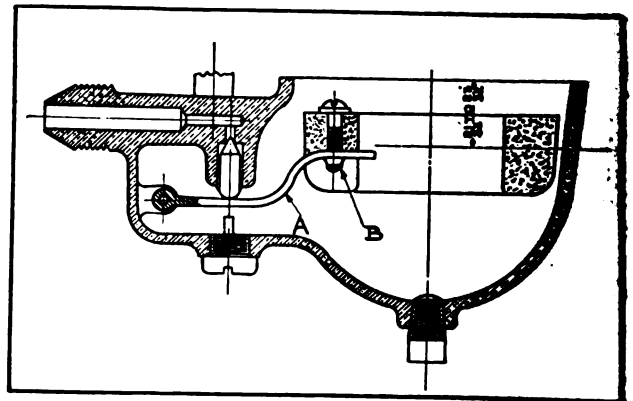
In Testing Level of Fuel in Float Chamber of Cadillac Carburetor the Spraying Nozzle Is Removed.
